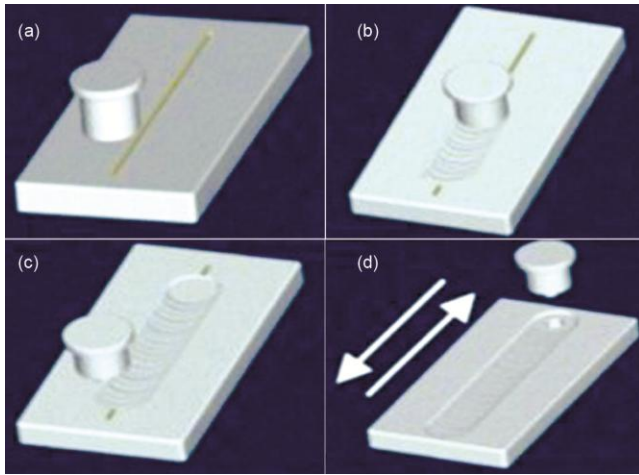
Schematic Diagram of Multi-pass FSP Technique with groove filling technique, (a) Tool and Workpiece positioning, (b) Friction Stir Processing during 1st pass, (c) Tool after completing 2nd pass, and (d) Tool after completing multi-pass for FSP¹¹.
